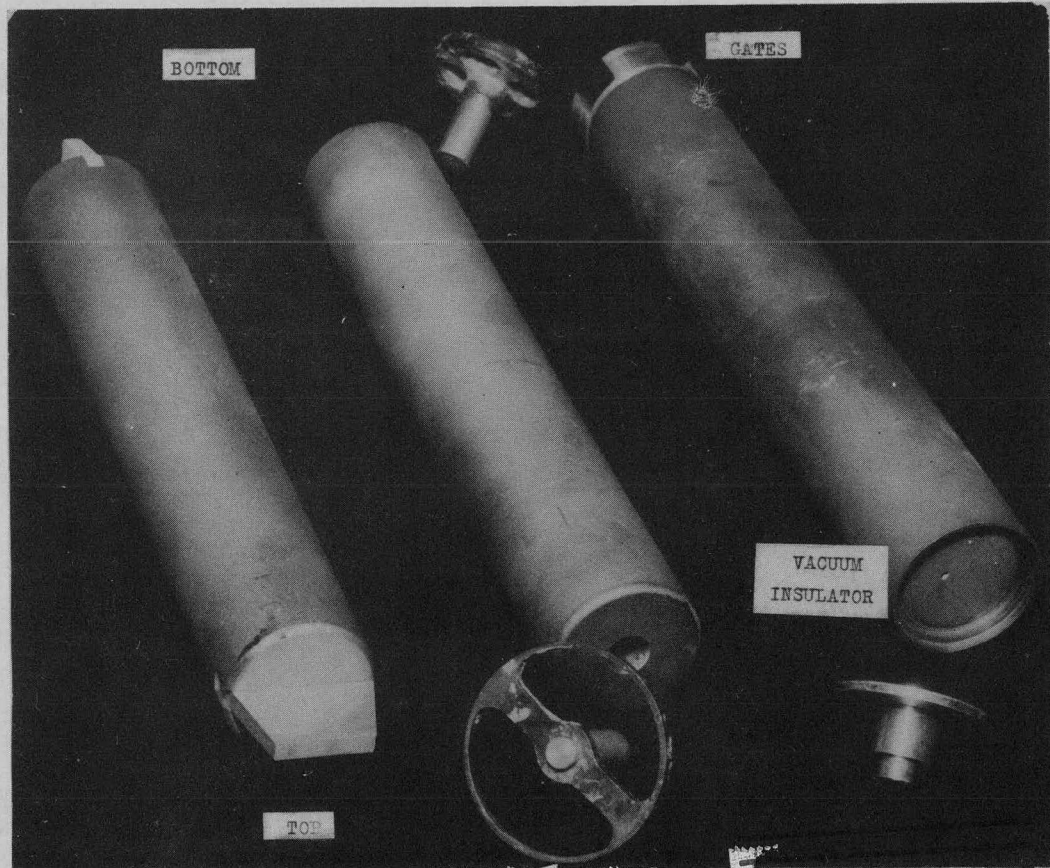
SLUG CENTERING DEVICE ASSEMBLIES.
